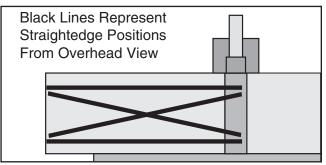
Straightedge positions for verifying if outfeed table is parallel with cutterhead.
